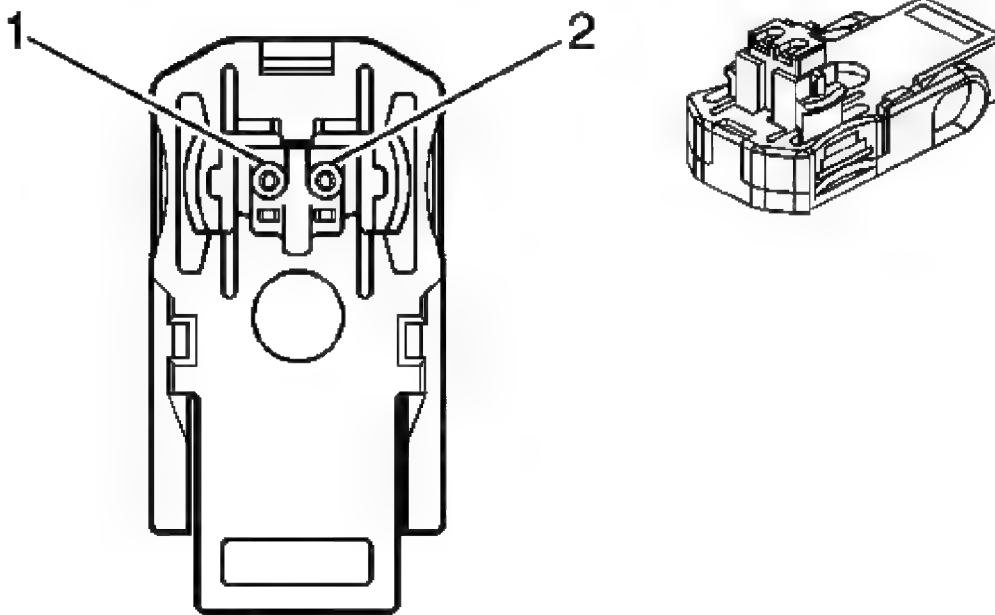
Inflatable Restraint Side Impact Module Connector End View - Left
